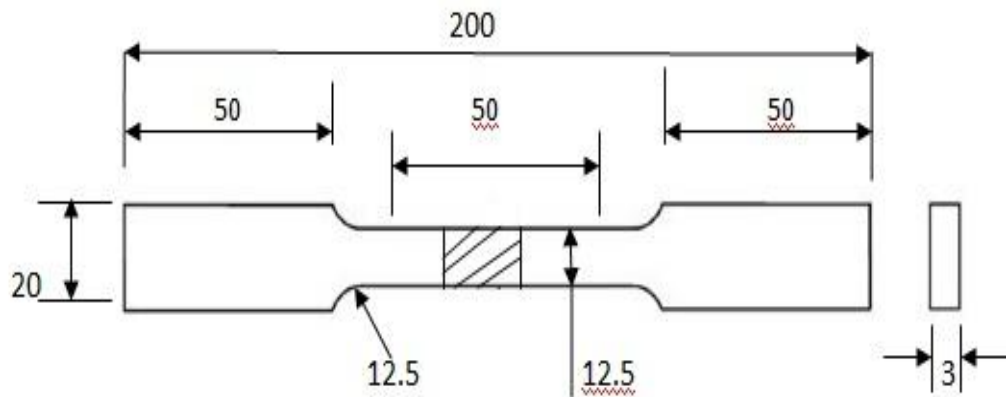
Tension test specimen geometry, dimensions are in millimeters
